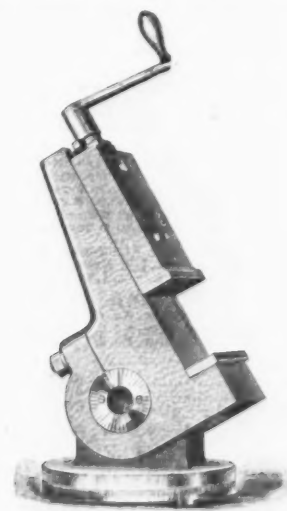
Universal Vise Chuck for Milling Machines, Planers, Drill Presses, &c.
